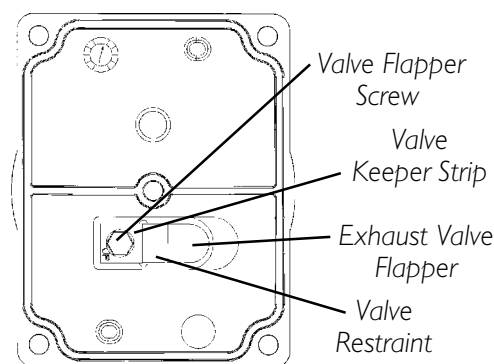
INSTALL THE NEW EXHAUST VALVE FLAPPER, VALVE RESTRAINT AND VALVE KEEPER STRIP
